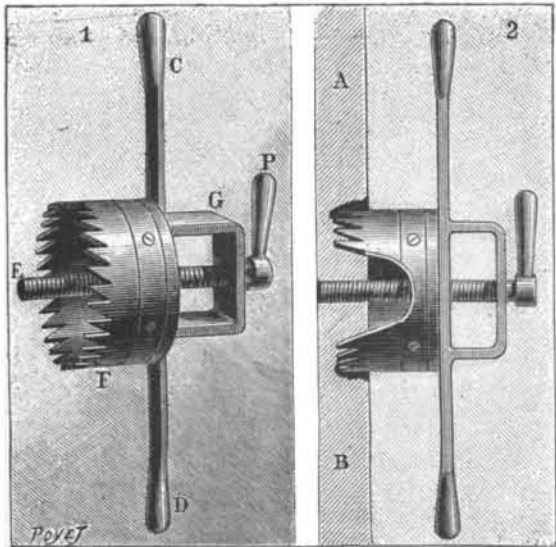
IMPROVED BURGLAR'S DRILL.
